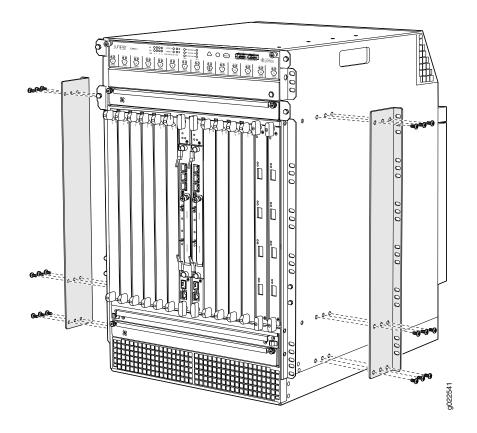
Moving the Mounting Brackets to the Center of the Chassis in an EX9214 Switch
